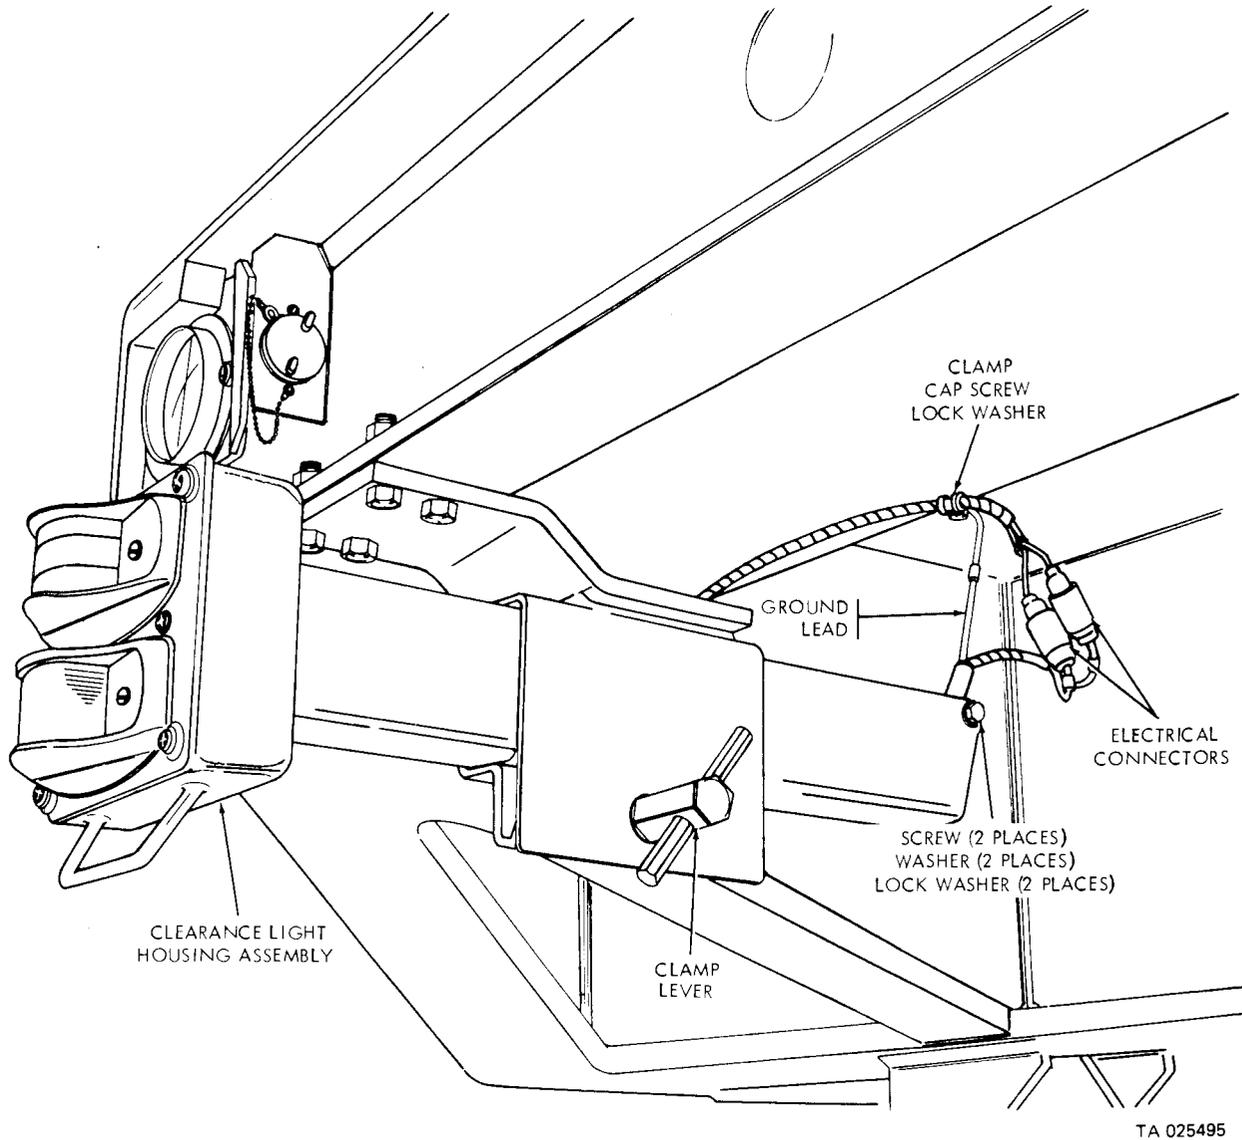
Retractable clearance light housing assembly (semitrailer No. 1 through 200 ).
